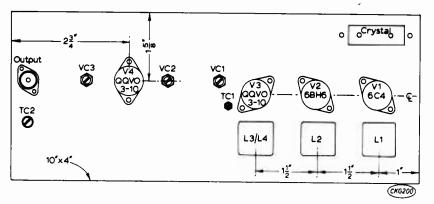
Marking-out details on top of the chassis. Holes for the single tag stand-offs can be drilled as construction proceeds.
